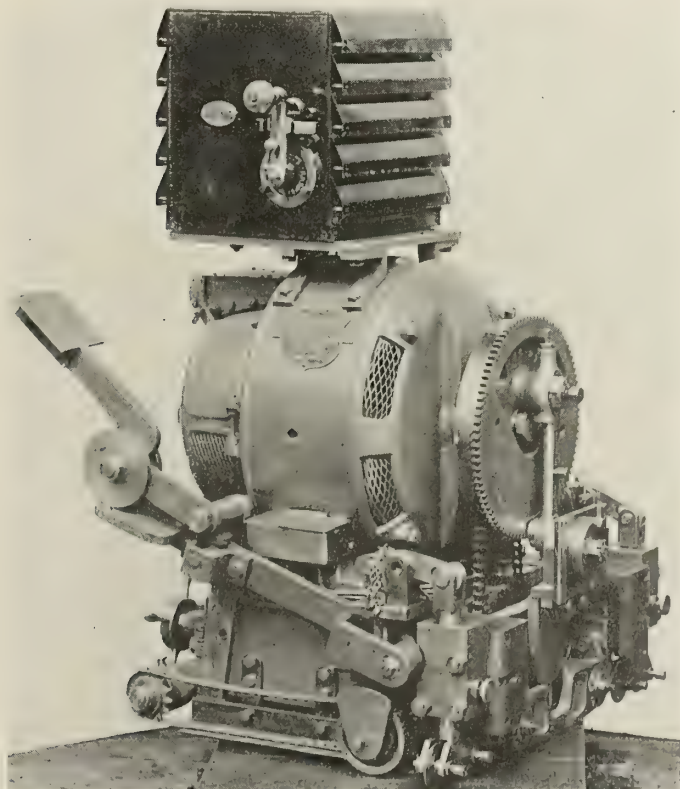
Clyde Deck Calking Machine in Position for Traversing
